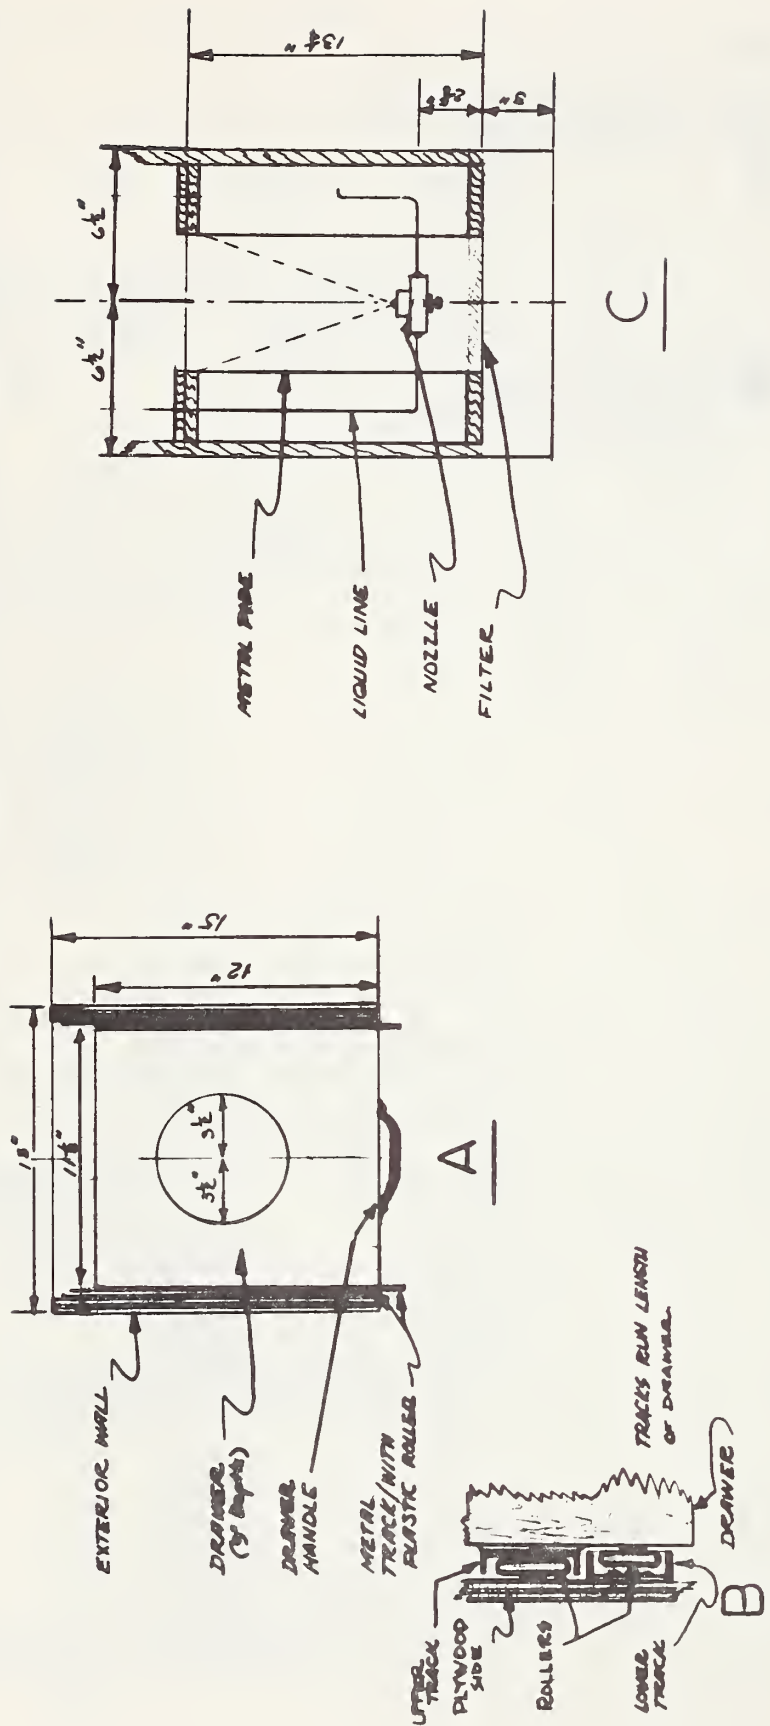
A, Top view of section B; B, Detail of upper and lower tracks and rollers of drawer, left front view; C, cross section of section C.
